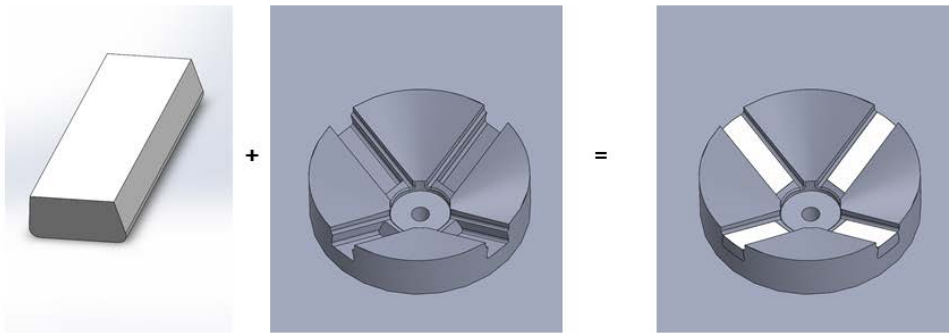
3 Inserts made from prefabricated Ni disk is assembled with mould cavity. From left to right: the Ni piece with micro structure on the surface, cavity for the injection side and the assembly. The bright color shows the micro-structured side.
